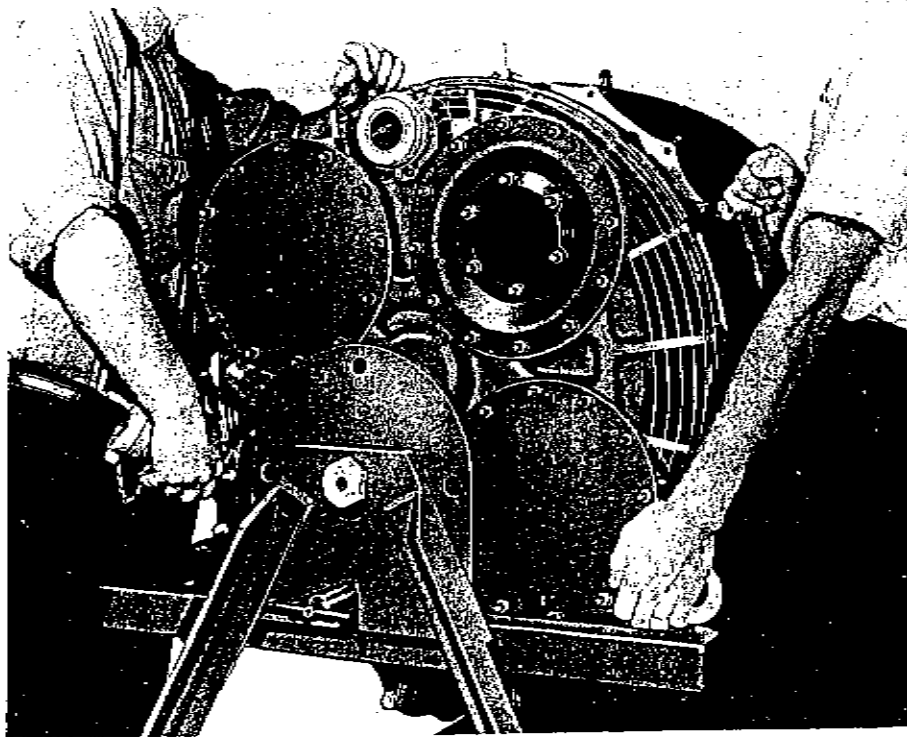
Lifting Off Complete Fan Inlet and Gear Housing Assembly
